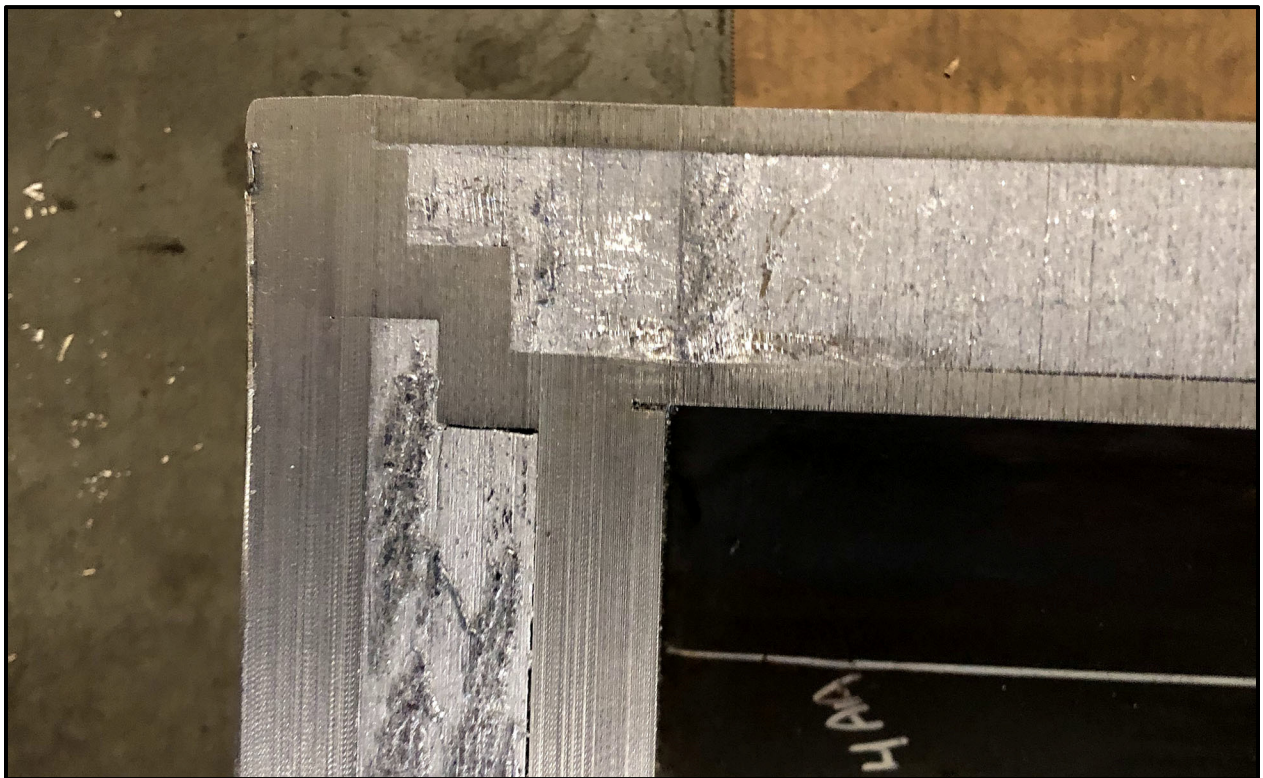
SC-30G2 18TU-01 Destructive Disassembly Cut AA at Lower Flange
